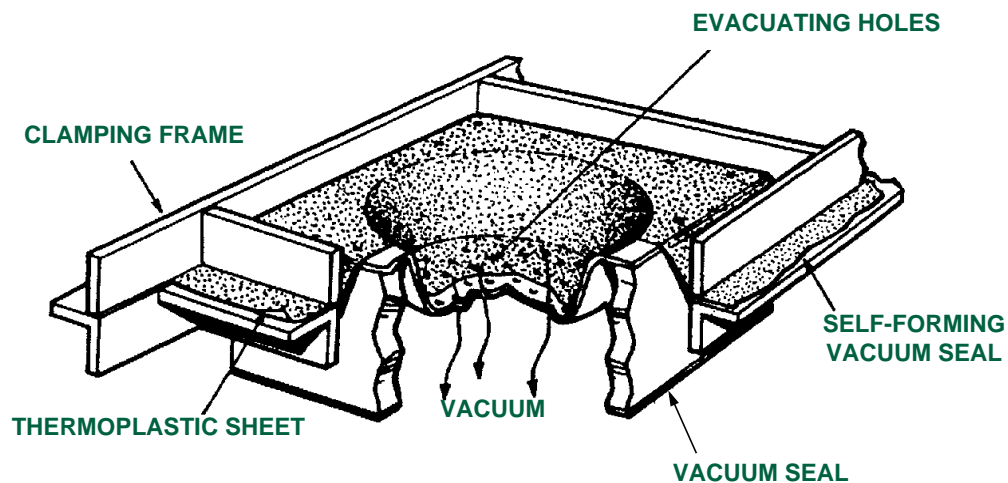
VACUUM FORMING MOULD - CAVITY TYPE
